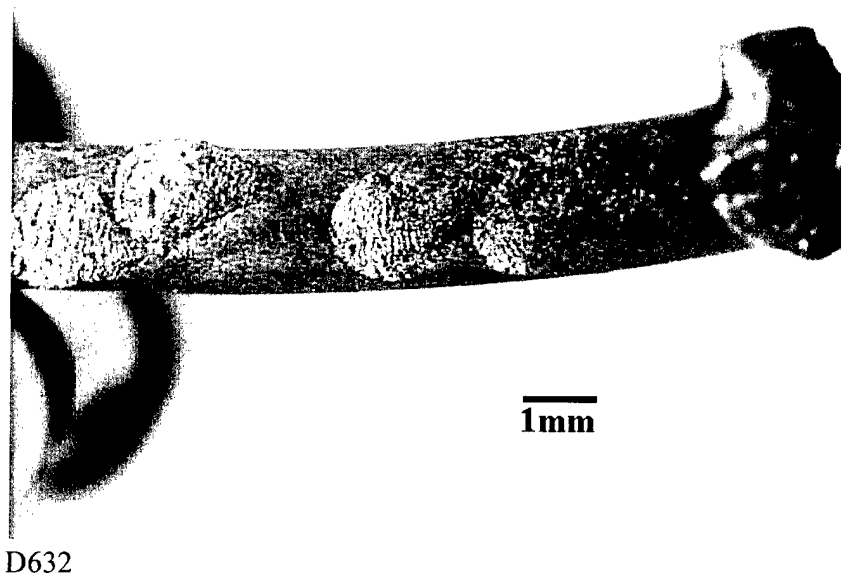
Mushroomed fracture surface and impacted regions for Shot 226.
